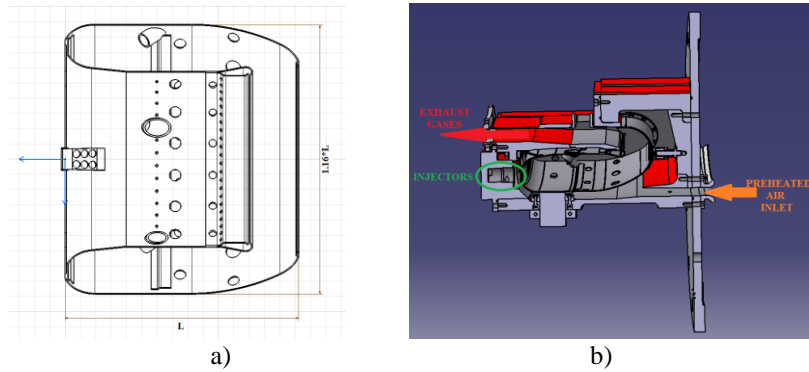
a) the fire tube; b) section through the combustion chamber CAD model
